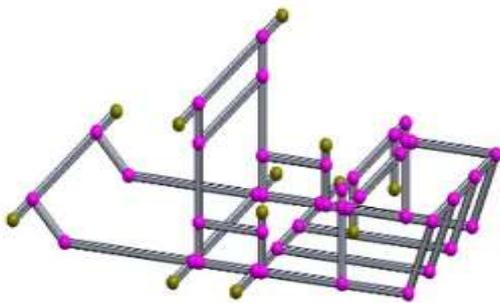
Welding point of the rice transplanting machine main frame
